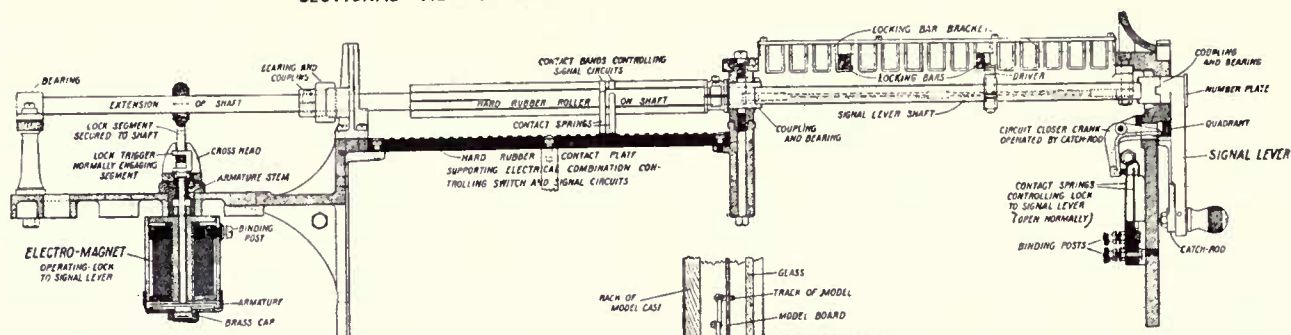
The Westinghouse Electro-Pneumatic Interlocking Machine.
